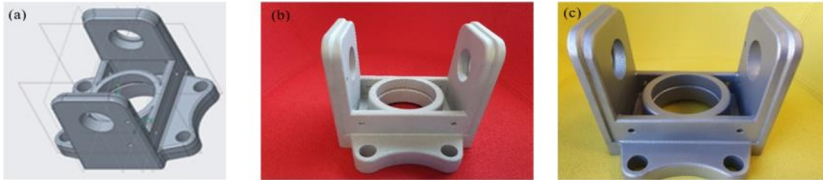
a) 3D model of candidate spare part, b) Printed parts by DMLS method and AlSi10Mg alloy, c) Part after post processing by additive-formulated consumables method.
